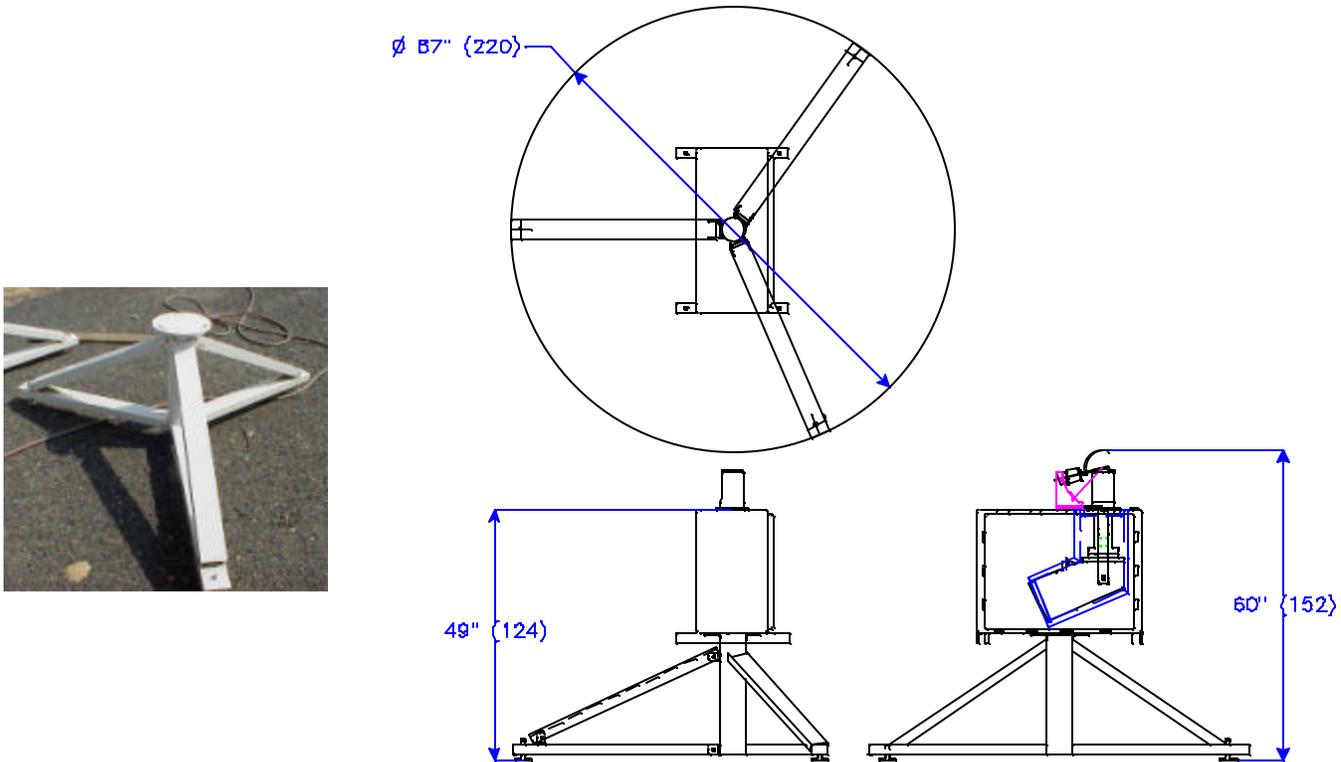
RSS shown mounted on optional tripod. Dimensions in inches (cm).
